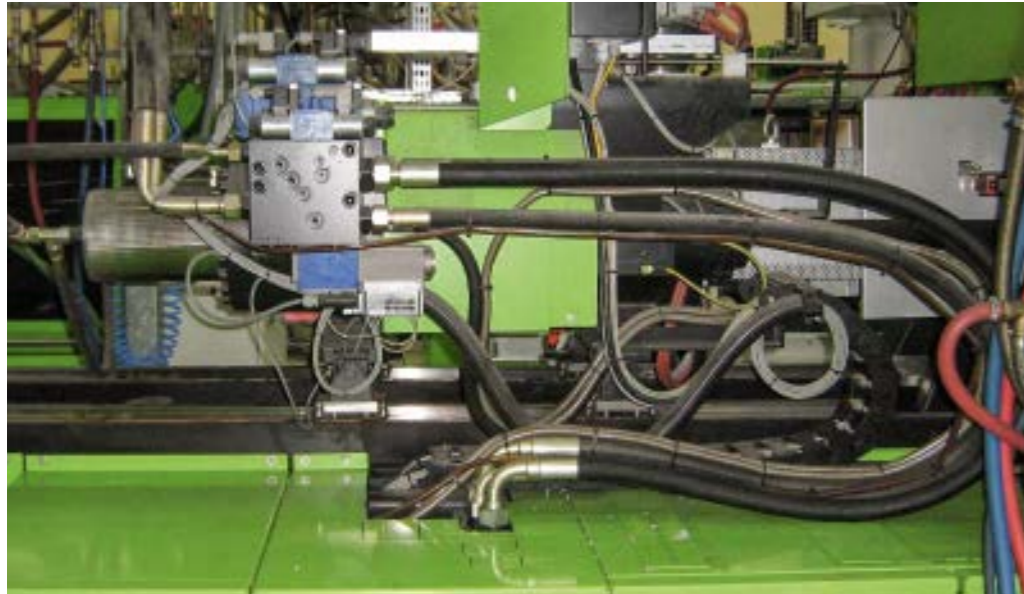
Freely accessible hose lines on a plastic injection moulding machine.
